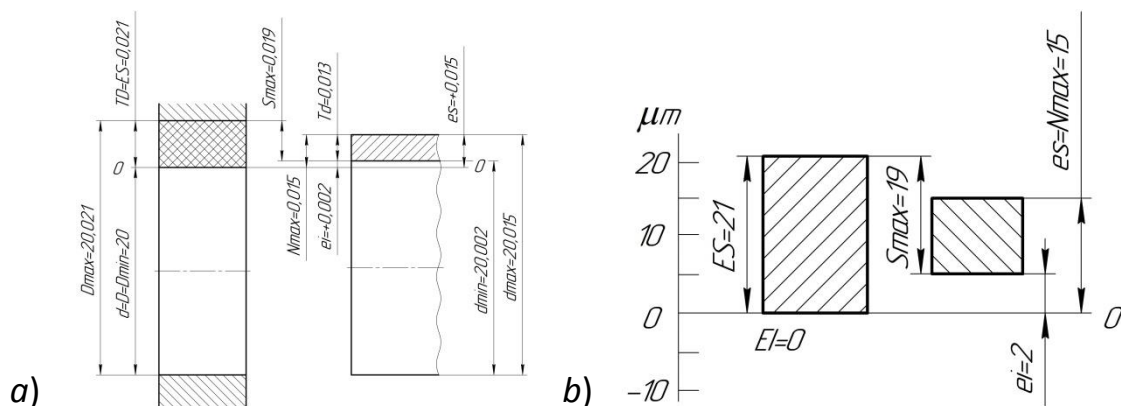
Is a layout of tolerance limits for transitional fit
